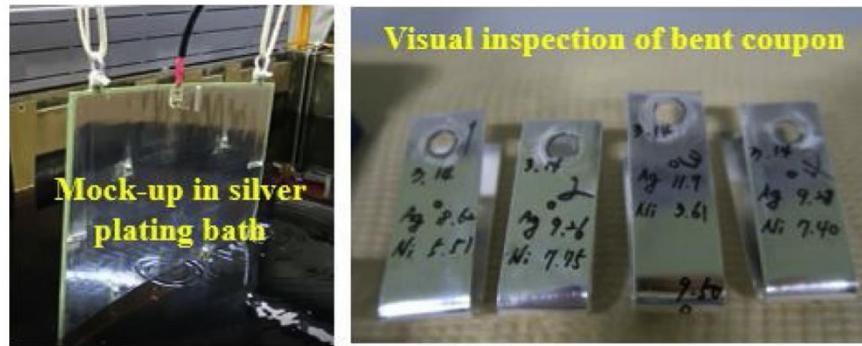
Silver coated mock-up and coupon adhesion inspection.
